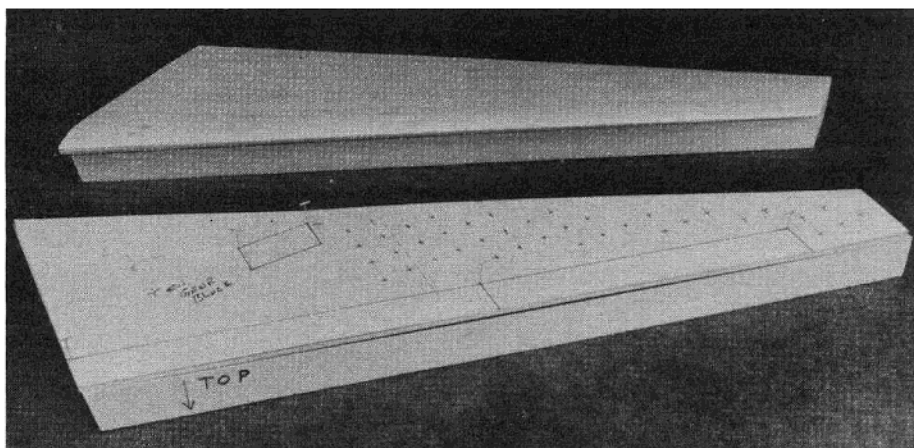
After sheeting, the same paper template is used to locate exact position of aileron bay, gear plate and gear dowel.
